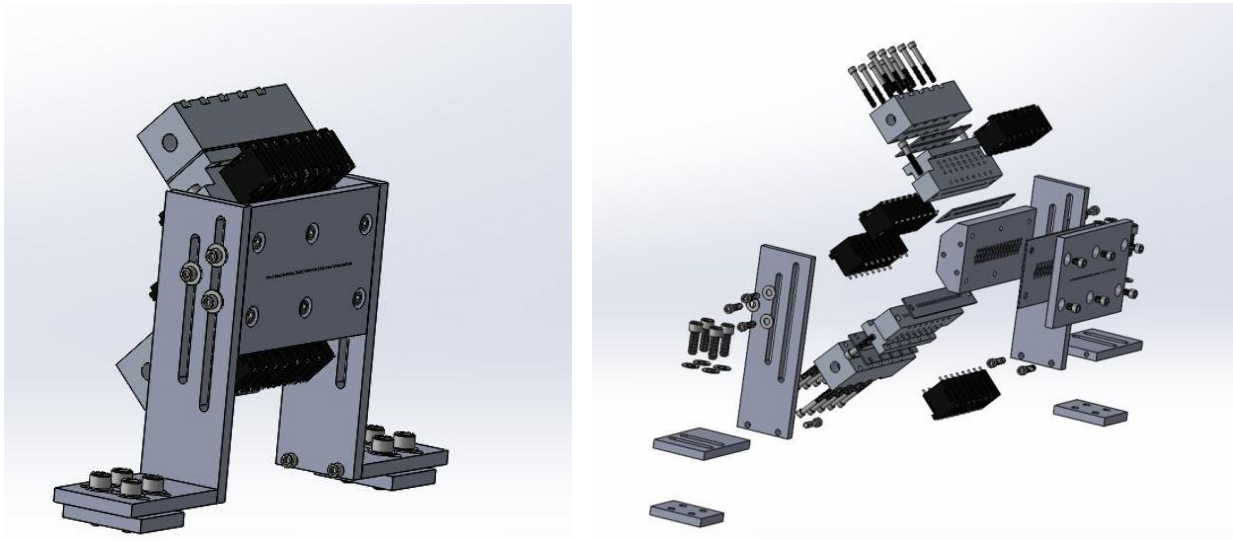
Mechanical drawings of the airjet manifold used for waterfall sorting.
